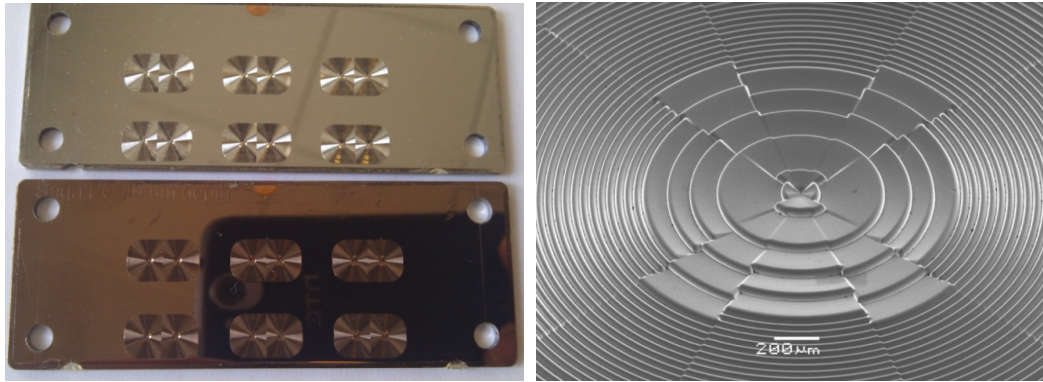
Left upper: Ni mould; Left lower: Ni mould with TiN as coating; Right: SEM picture of a Fresnel lens.
